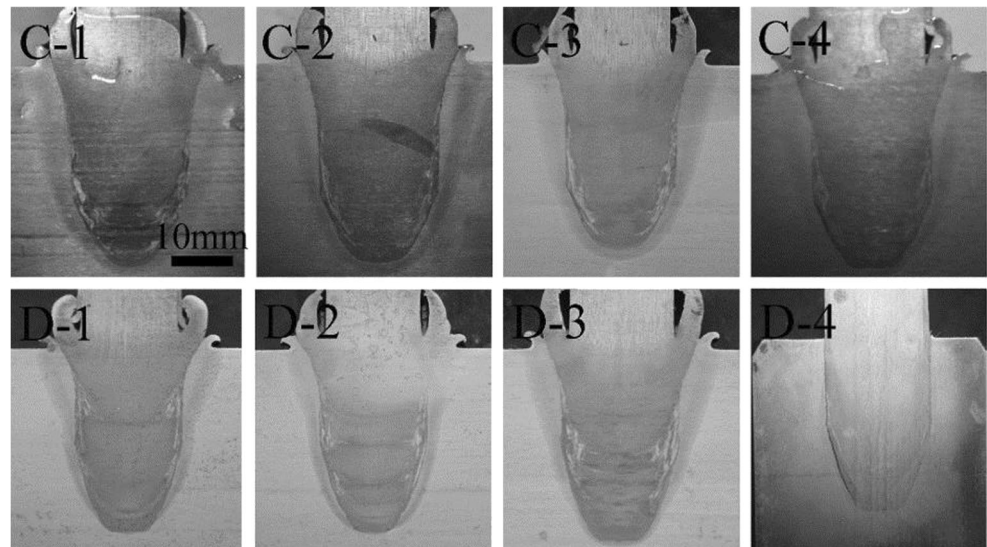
Typical welding defects in underwater FTPW weld: lack of bonding defect at weld root
